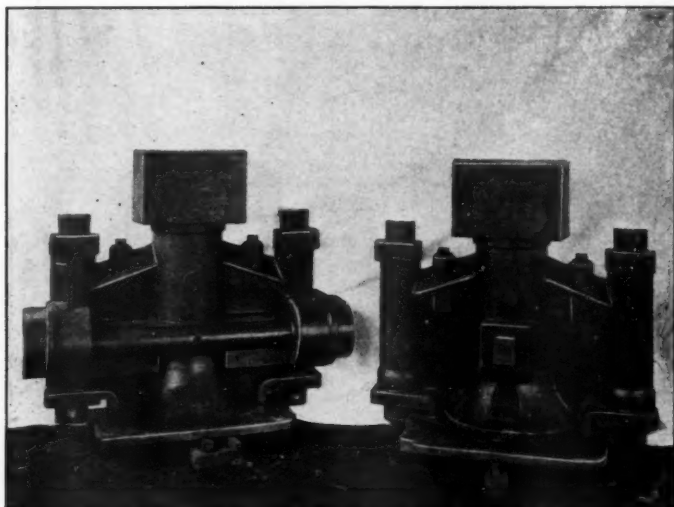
A HEAVY PATTERN ARRANGED FOR HAND MOLDING
